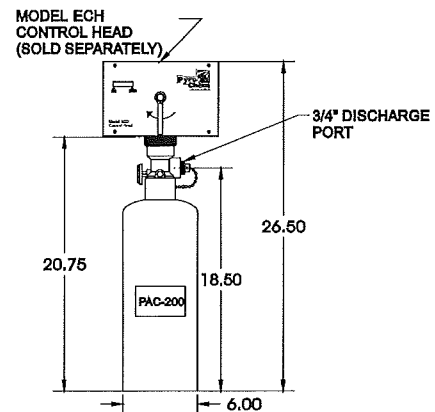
Model PAC-200 Pneumatic Actuating Cylinder.
